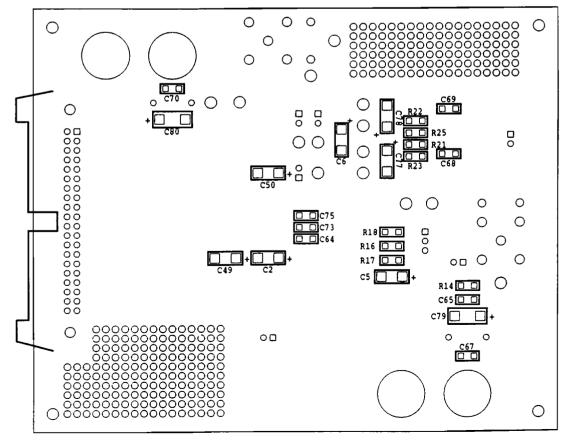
Silkscreen Layer, Circuit Side PCB Layout
